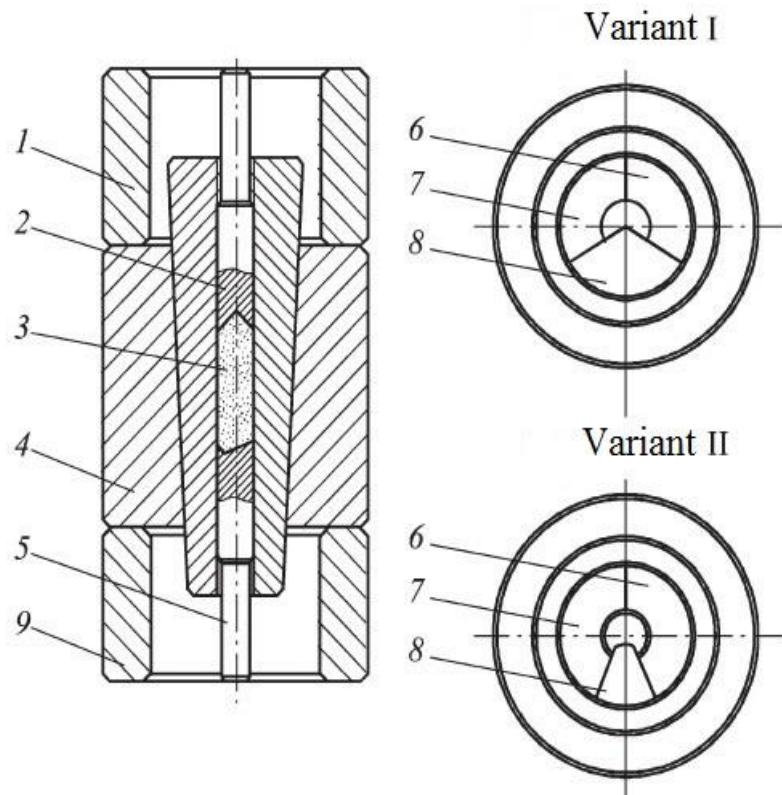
Mold design «VNIIinstrument» for pressing blanks of carbide tips gun drills:
